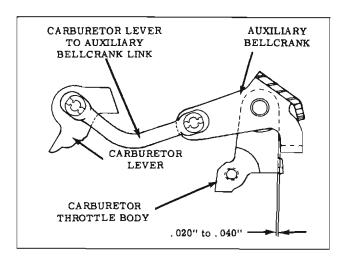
Checking Carburetor Link (4 Bbl.)
